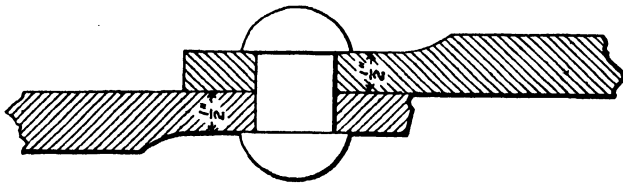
Circumferential joint for thick plates of horizontal return tubular boilers.
